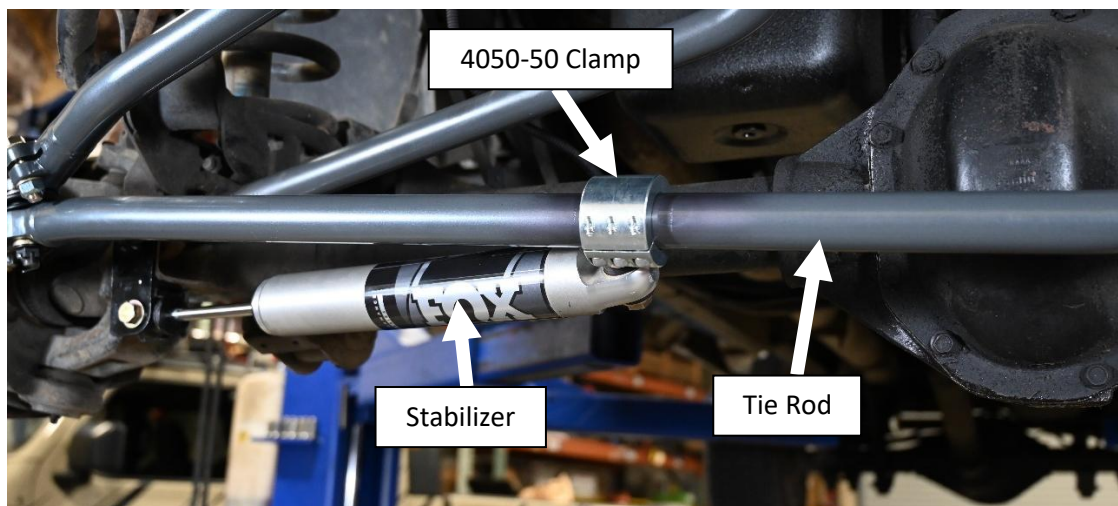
Steering Stabilizer Shown Mounted to 4050-50 Clamp
